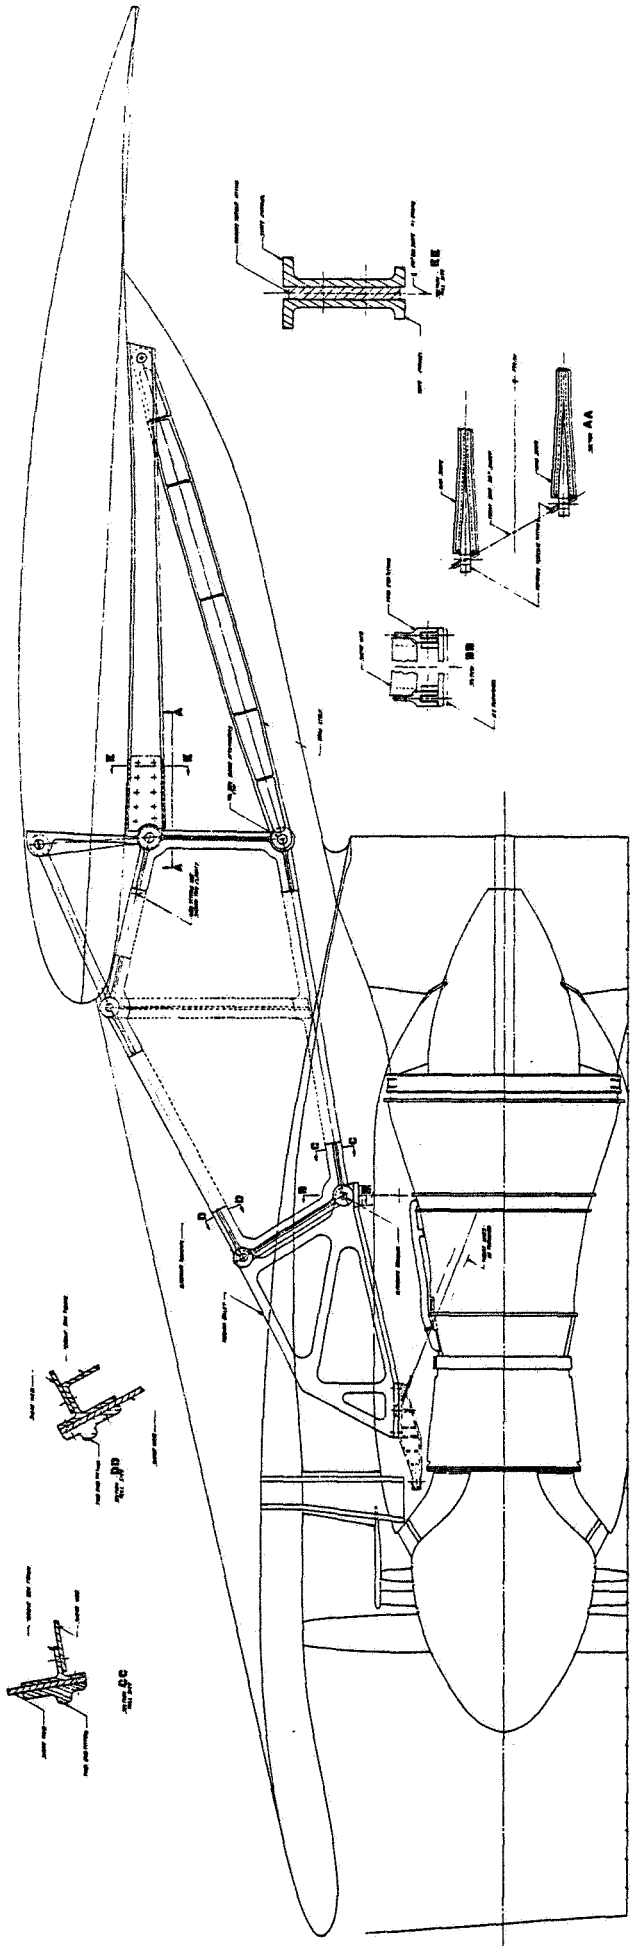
Wing Engine Installation Layout with E3 Engine.
